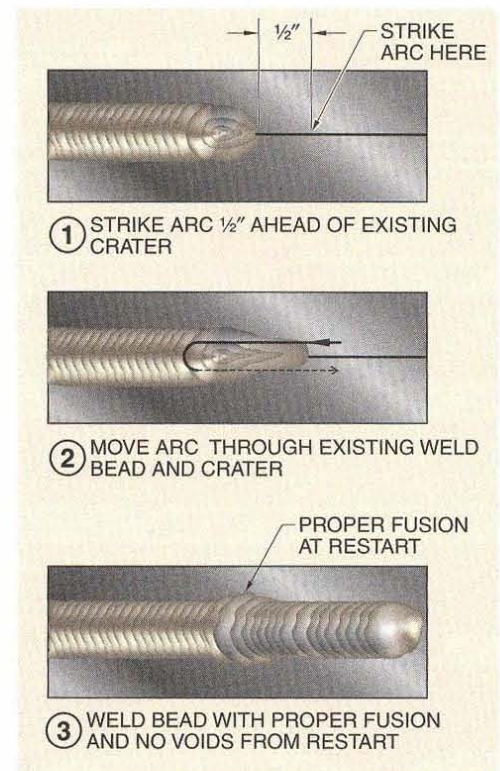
To continue a bead, strike the arc 1/2" from the front edge of the previously deposited weld bead and move the electrode back over the crater. At the back edge of the crater, dip the electrode to remelt and continue with welding, properly filling the crater.
